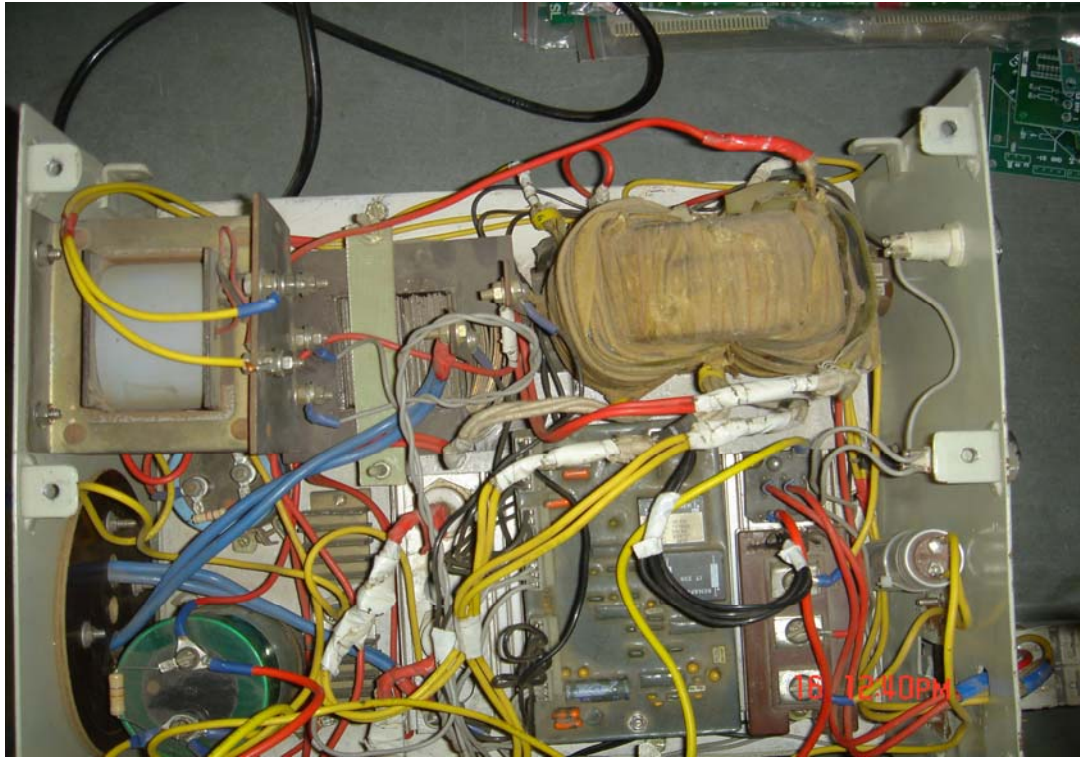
Internal layout of the SCR based inverter welding machine
